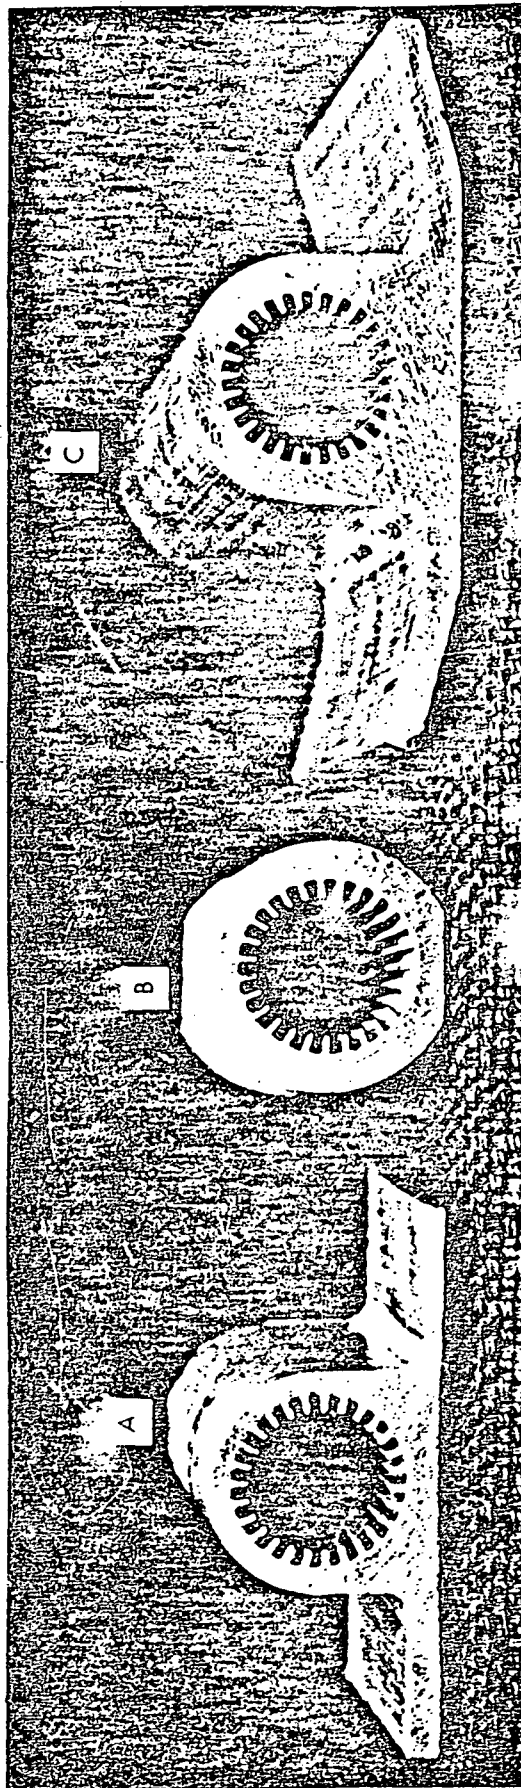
Extruded 6063 Aluminum Grooved
